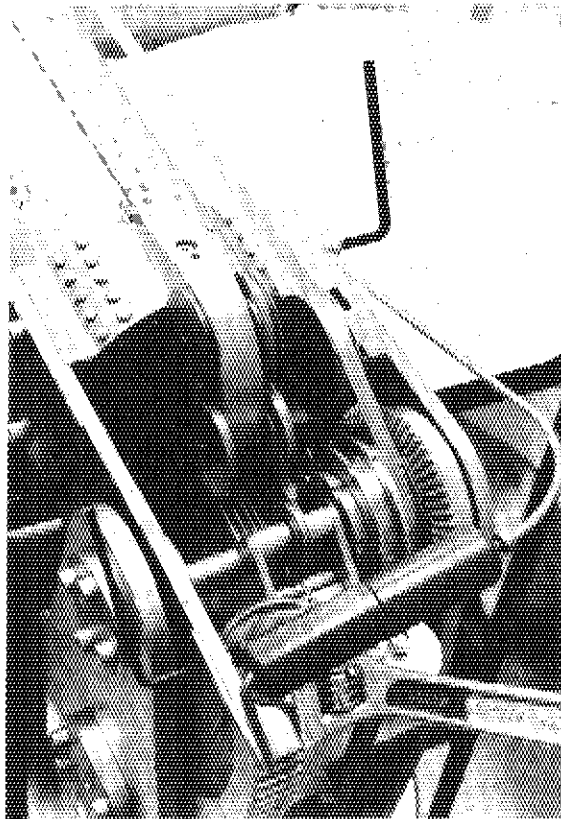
Disassembly of the boot separator at slave arm shoulder of the type A 100 standard manipulator
